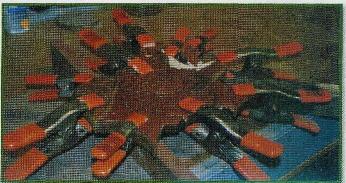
Glue the assembled project onto the backer board and clamp in place.
